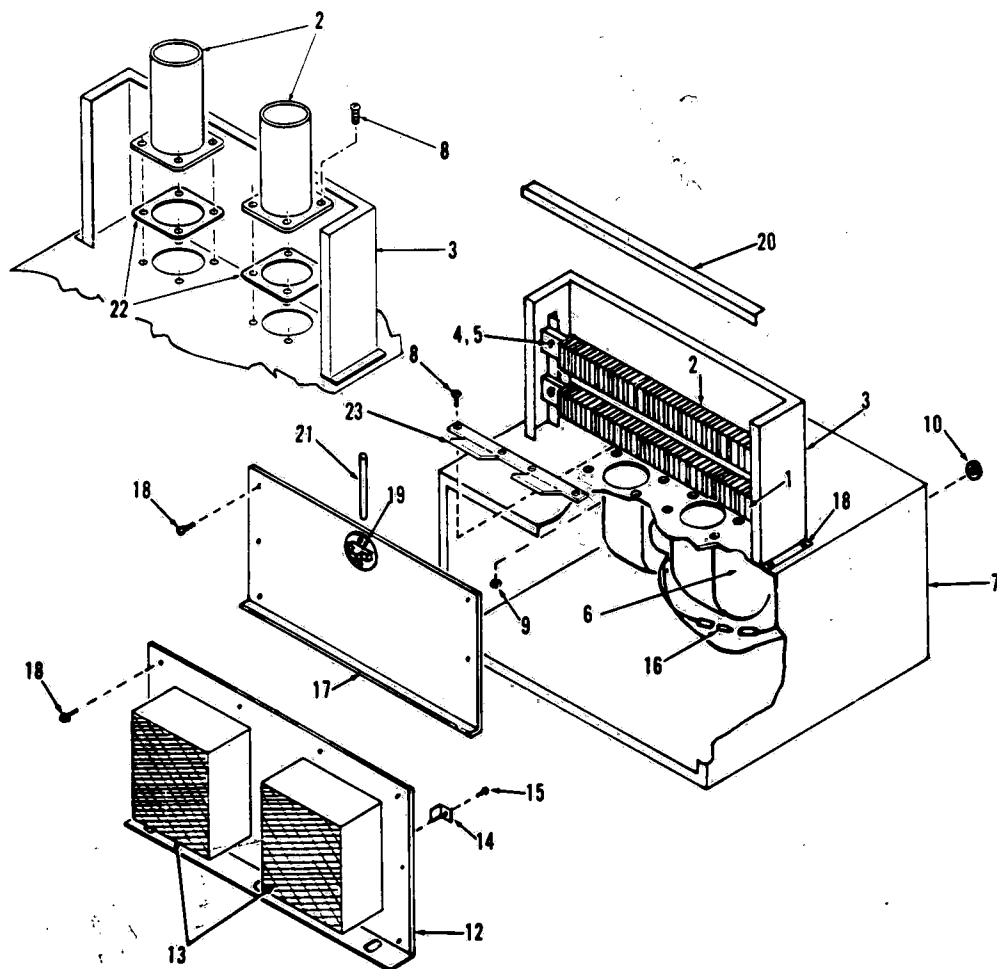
A. HEATER, FAN AND FILTER ASSEMBLY, Medium Aerator
